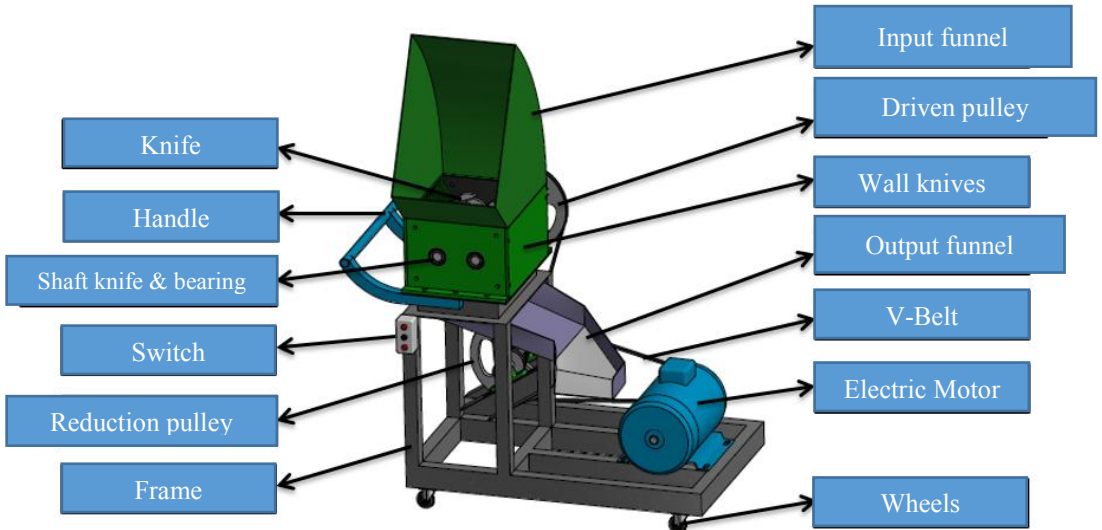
Portable chopping plastic waste machine utilizing electric motor as a whole.
